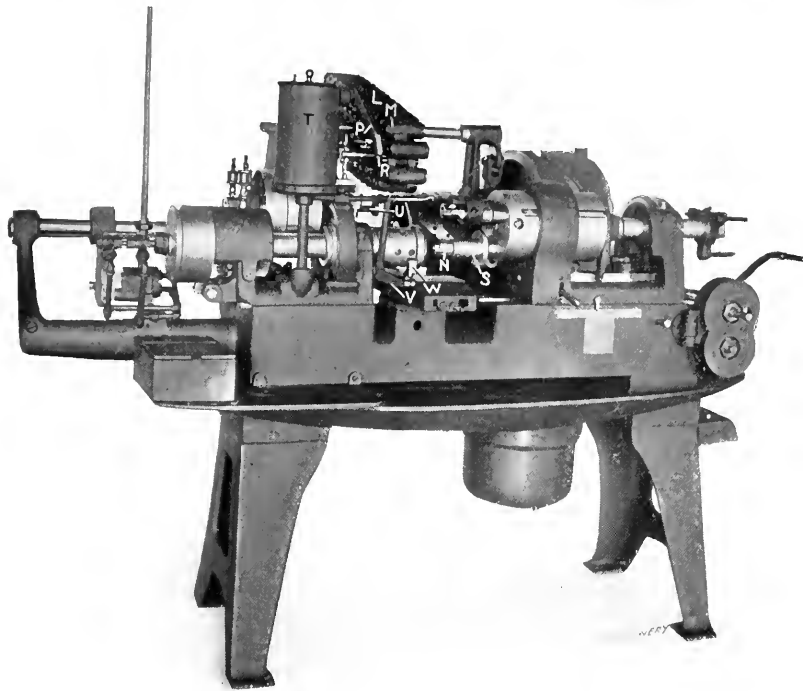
Arrangement of the Magazine and Chuck Mechanisms
